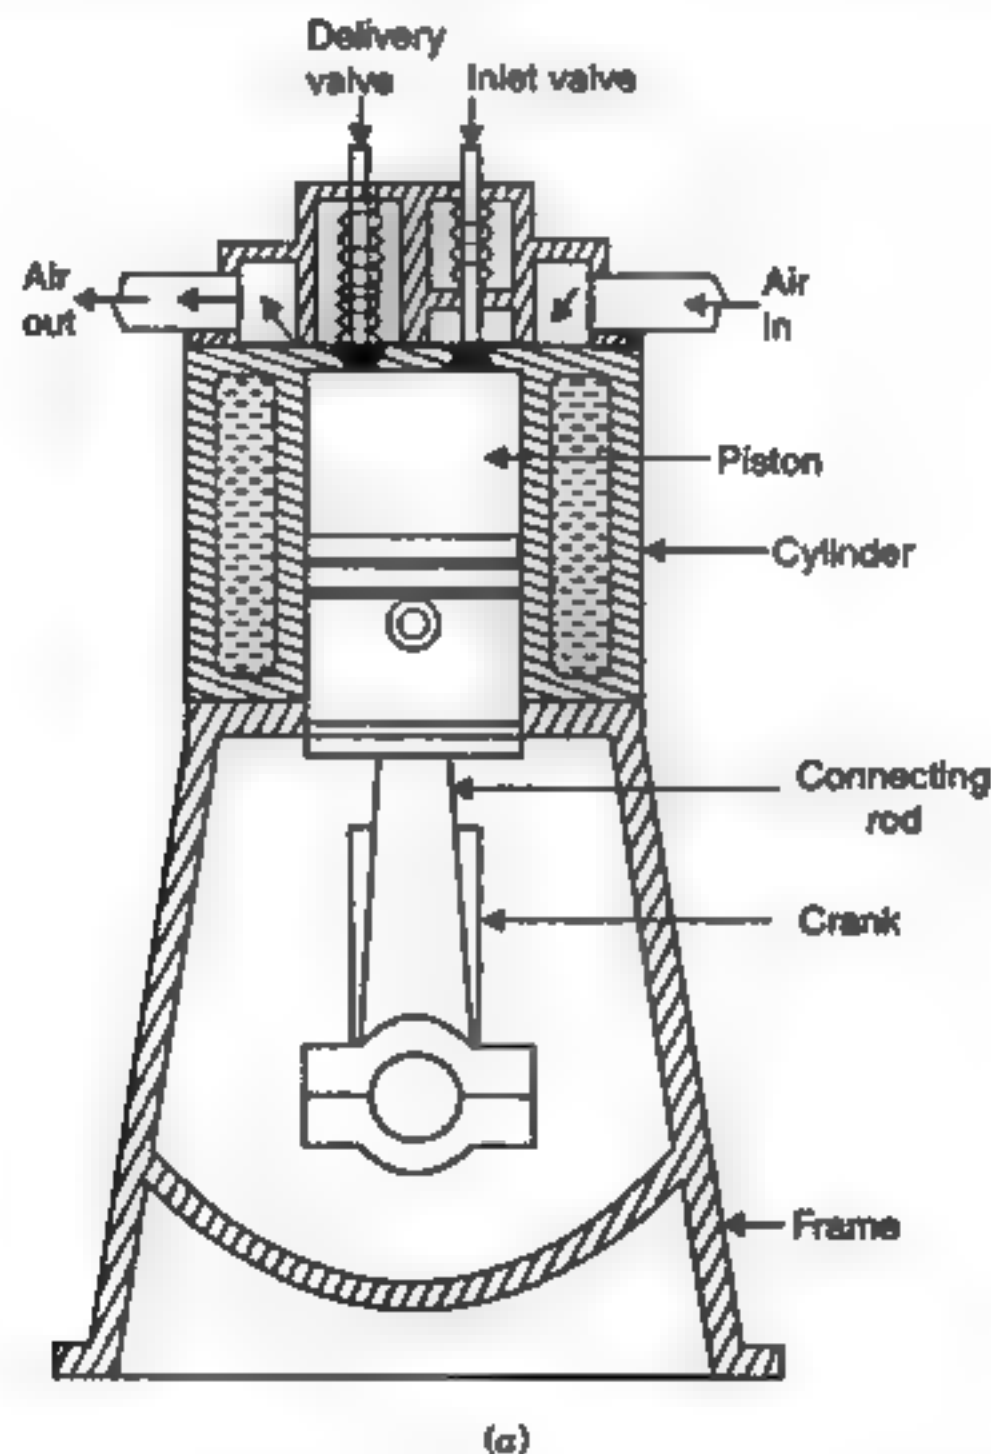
(a) Sectional view of a single-stage reciprocating compressor.
